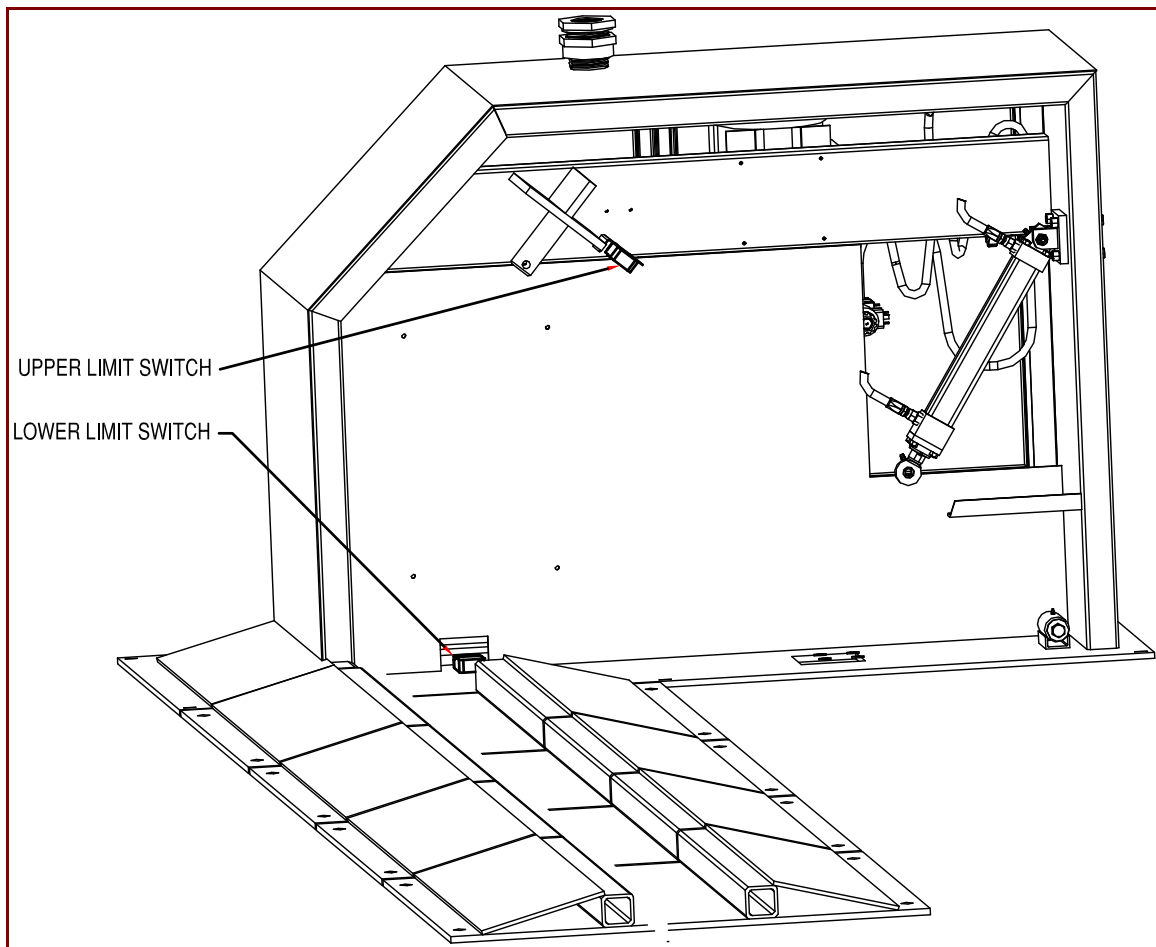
View of Upper and Lower Limit Switches, Control Cabinet
